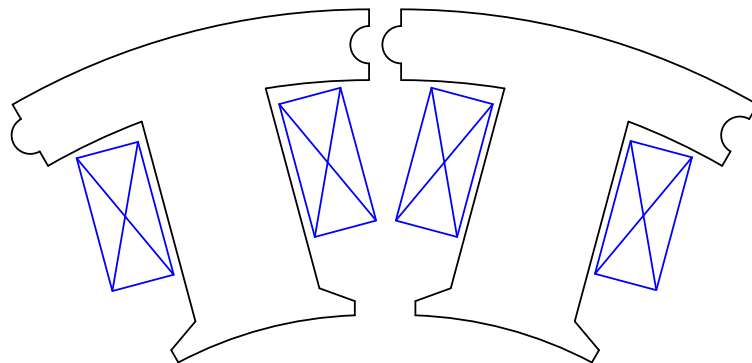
Illustration of conventional modular stator technique [AKI03].
